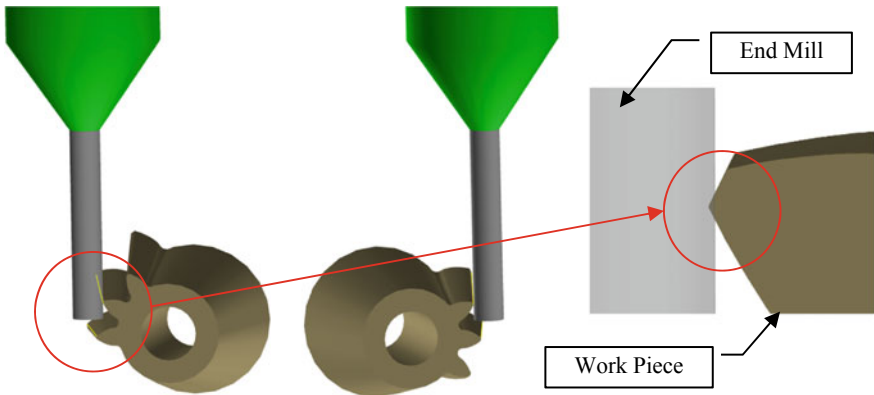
Tip chamfering of a small pitch cone angle bevel gear—EM tool side is used
